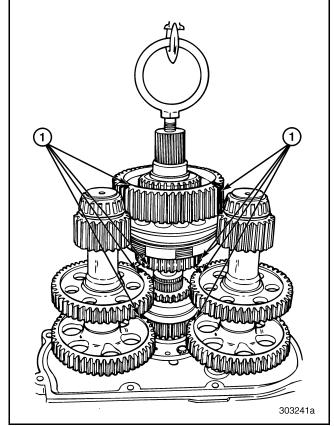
Removing Mainshaft and Synchronizer Assembly (T313L/T318L Shown)
